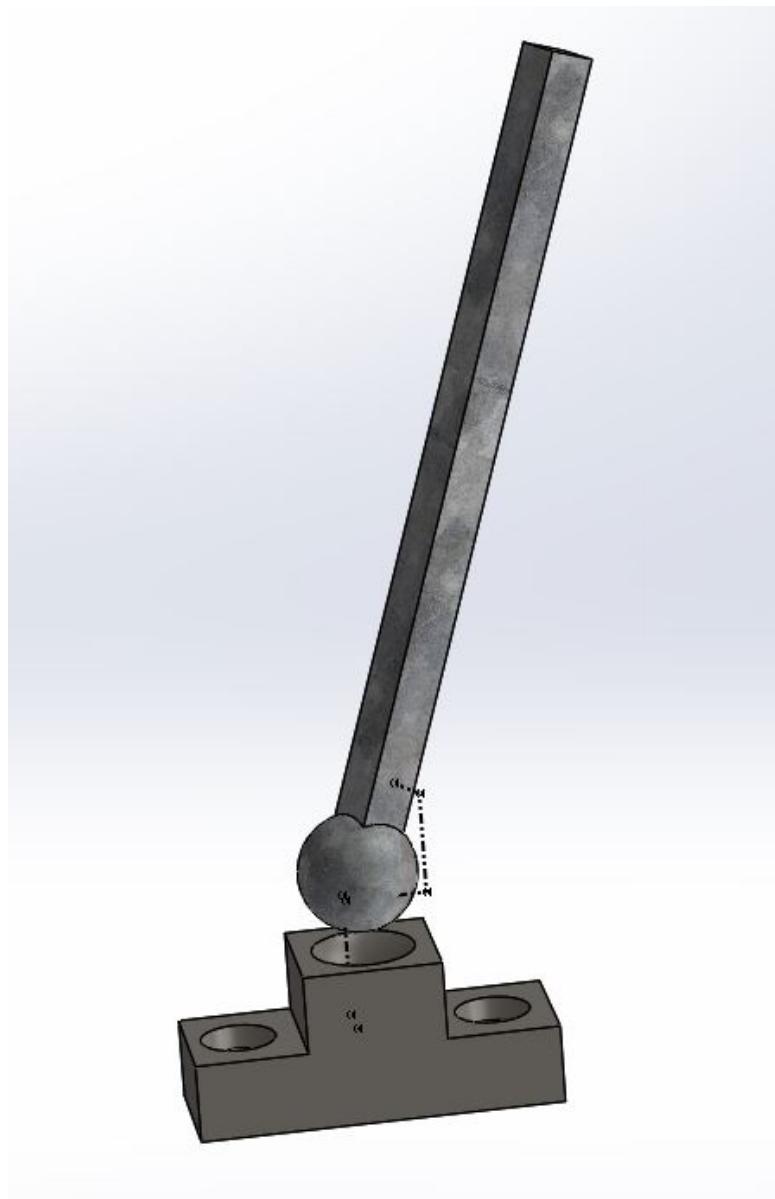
Sackett, Justin: Assembly Step 1
